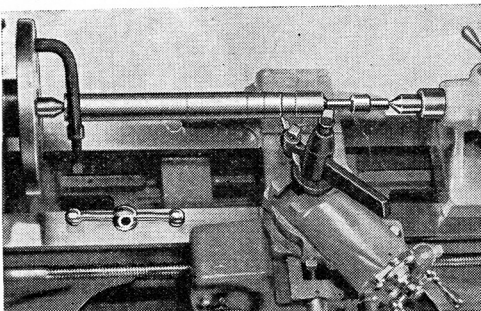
Work properly mounted between the lathe centers and ready to machine.
